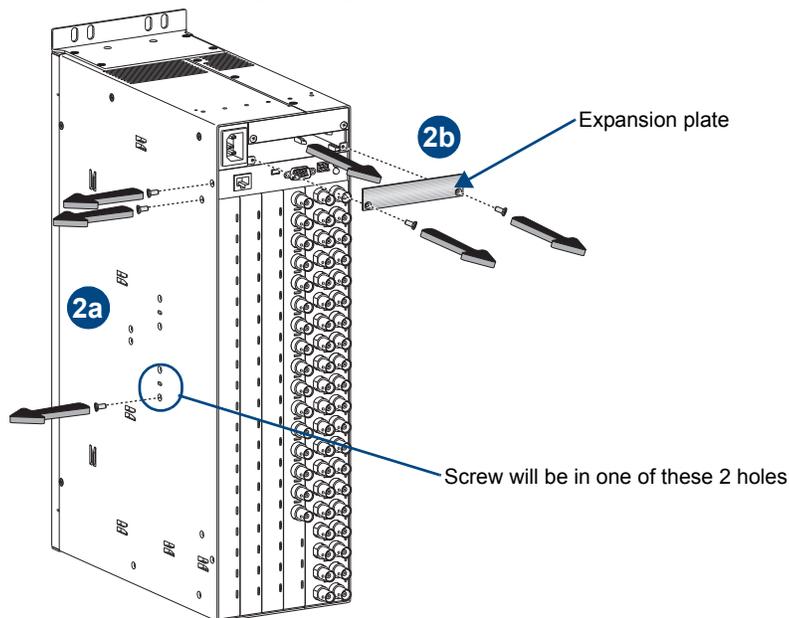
Remove 3 screws and expansion plate (2 screws)
